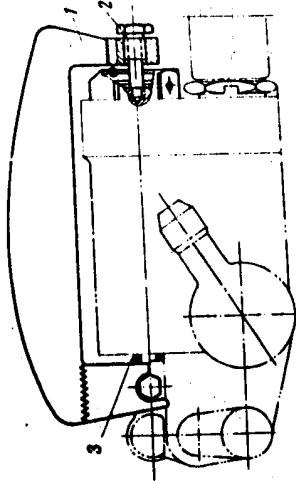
Fixture for checking operation of BY-13M hydraulic booster Duplicate Slide valve
